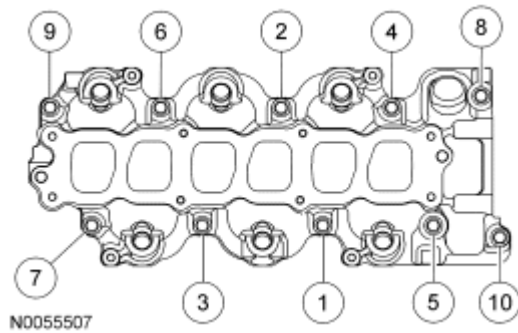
Installing Lower Intake Manifold Bolts In Sequence
